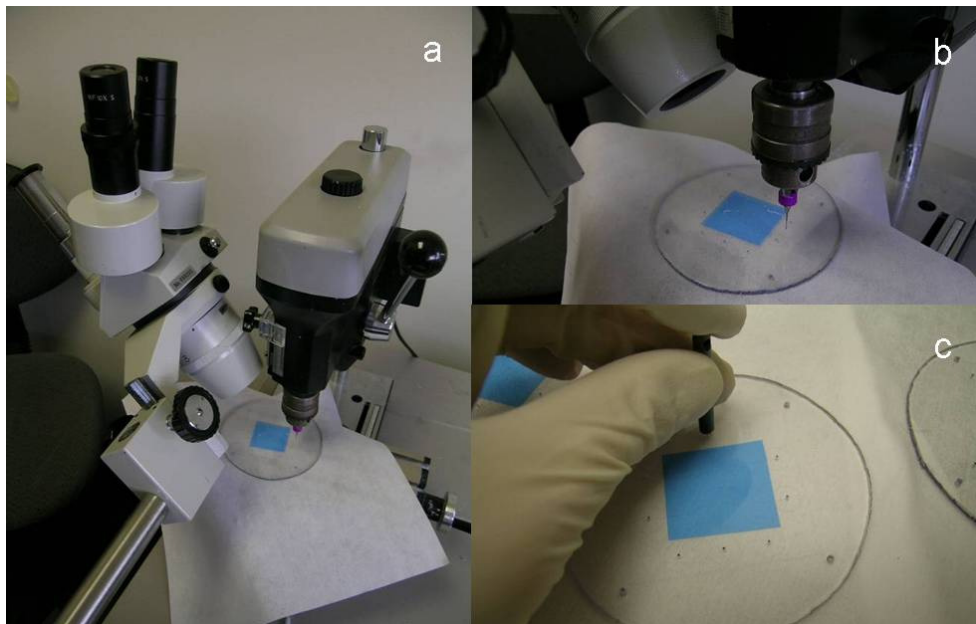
Hole drilling and deburring in pictures. (a) Close-up of the drilling setup, (b) The drilling setup consists of a miniature drill press and inspection microscope, and (c) Using an O-flute countersink to deburr the holes.
